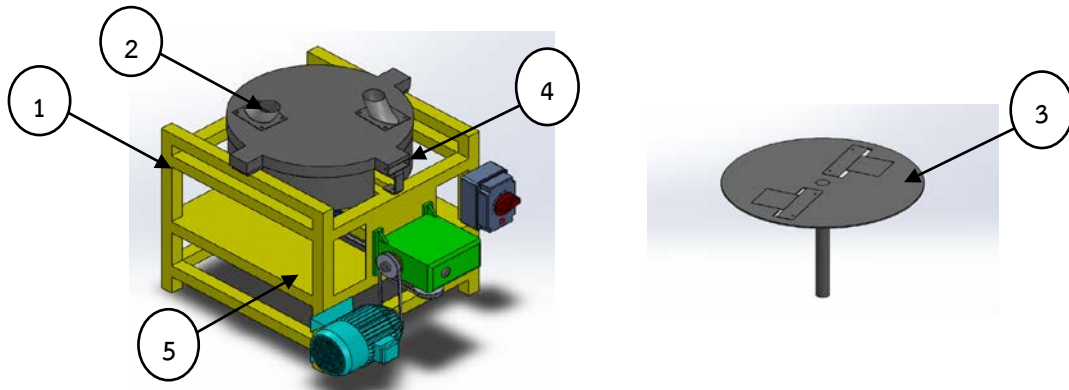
Machine (1) structure (2) feeding part (3) slicing part (4) body frame (5) support tray
